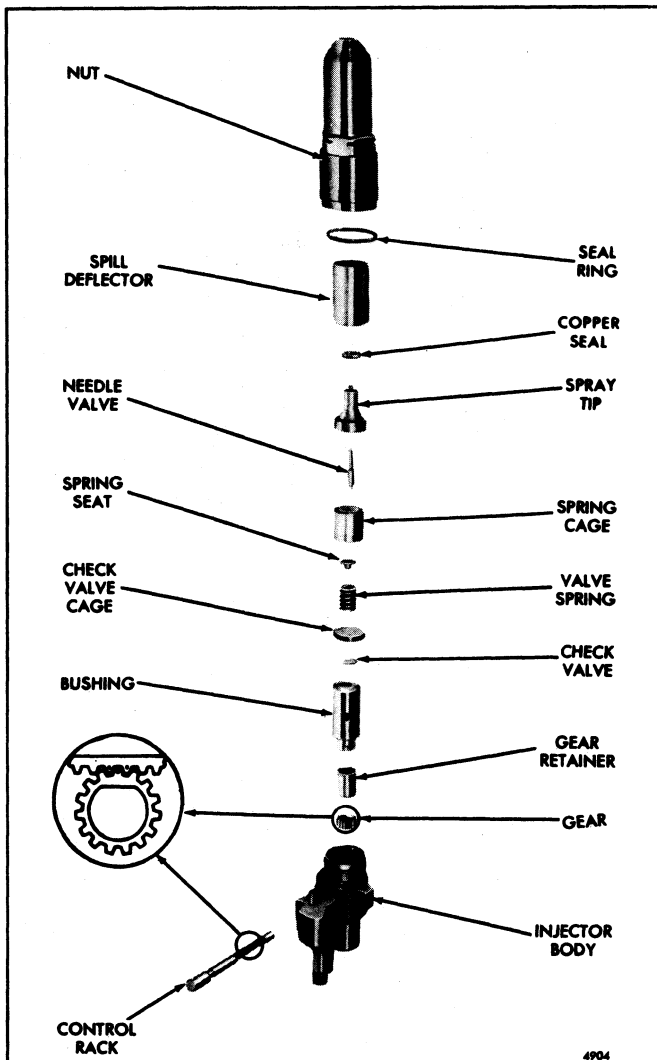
Injector Rack, Gear, Spray Tip and Valve Assembly Details and Relative Location of Parts
